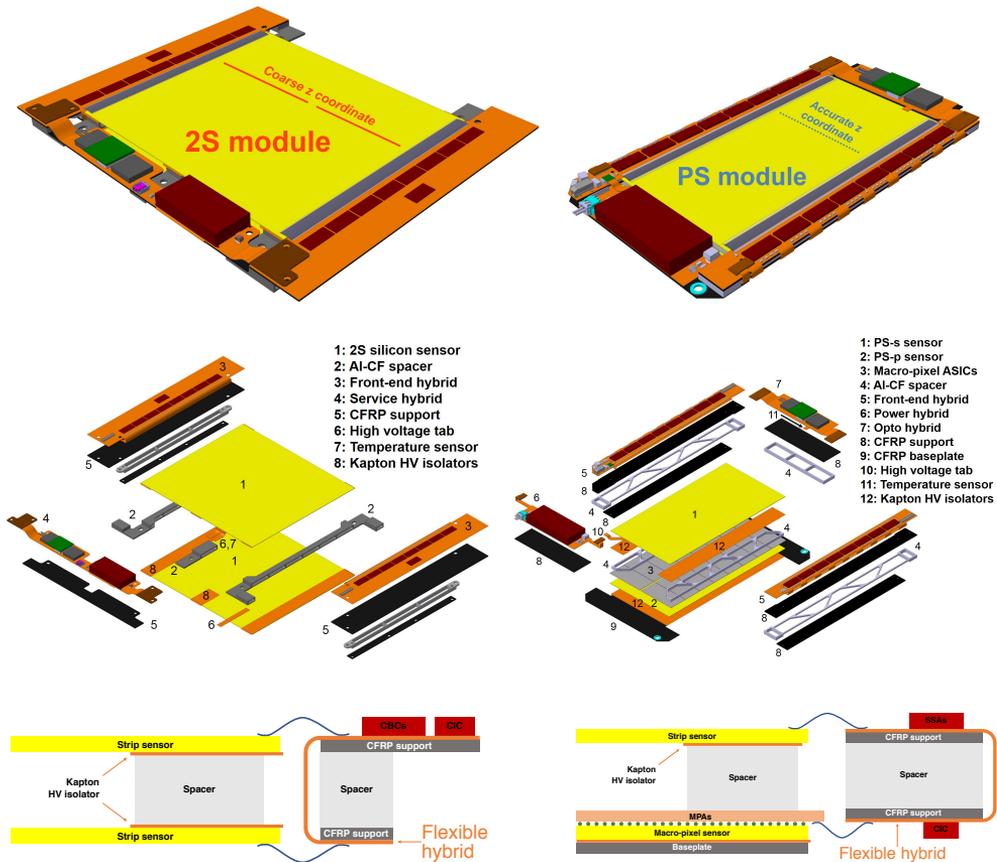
Assembled and exploded views of the 2S (TOP and MIDDLE LEFT) and PS module (TOP and MIDDLE RIGHT) showing the different components of both p_T module designs. The bottom row shows a transversal cut through the module and shows how the front-end ASICs are connected to the sensors [33].
